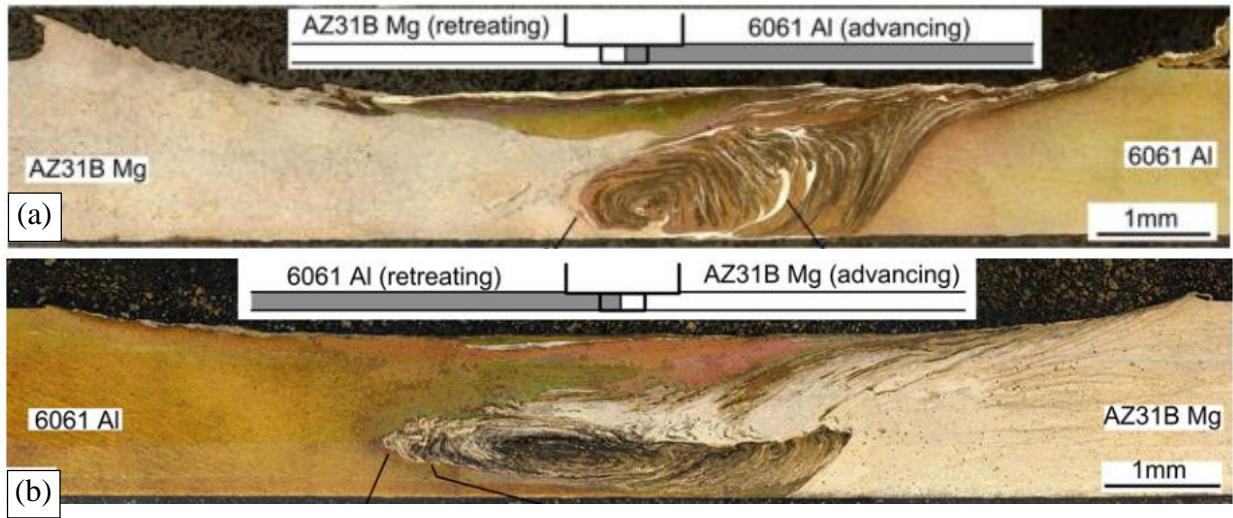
Transverse cross section of a butt weld made at 38 mm/min and 1400 rpm with (a) Al 6061 on the advancing side without tool offset, (b): AZ31B on the advance side without tool offset. ([Firouzdor and Kou, 2010a](#))
